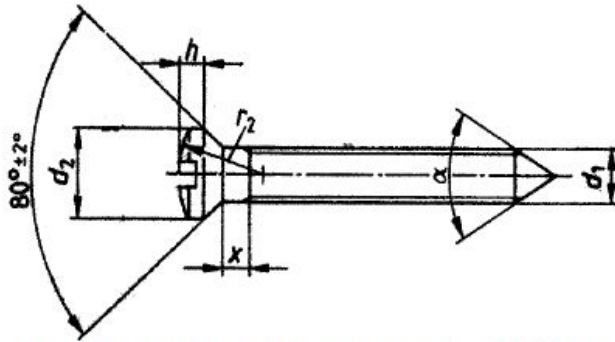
Schematic of HC Screw Dimensions (Table A6.1)
